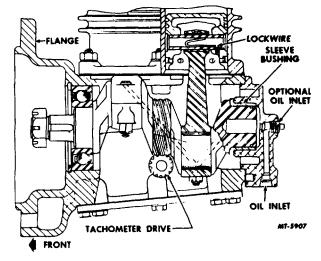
Air Compressor with Tachometer Drive (Model 7.4 Illustrated)
